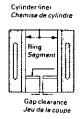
Piston ring gap clearance measurement Fig.5 Mesure du jeu de la coupe de segment de piston
